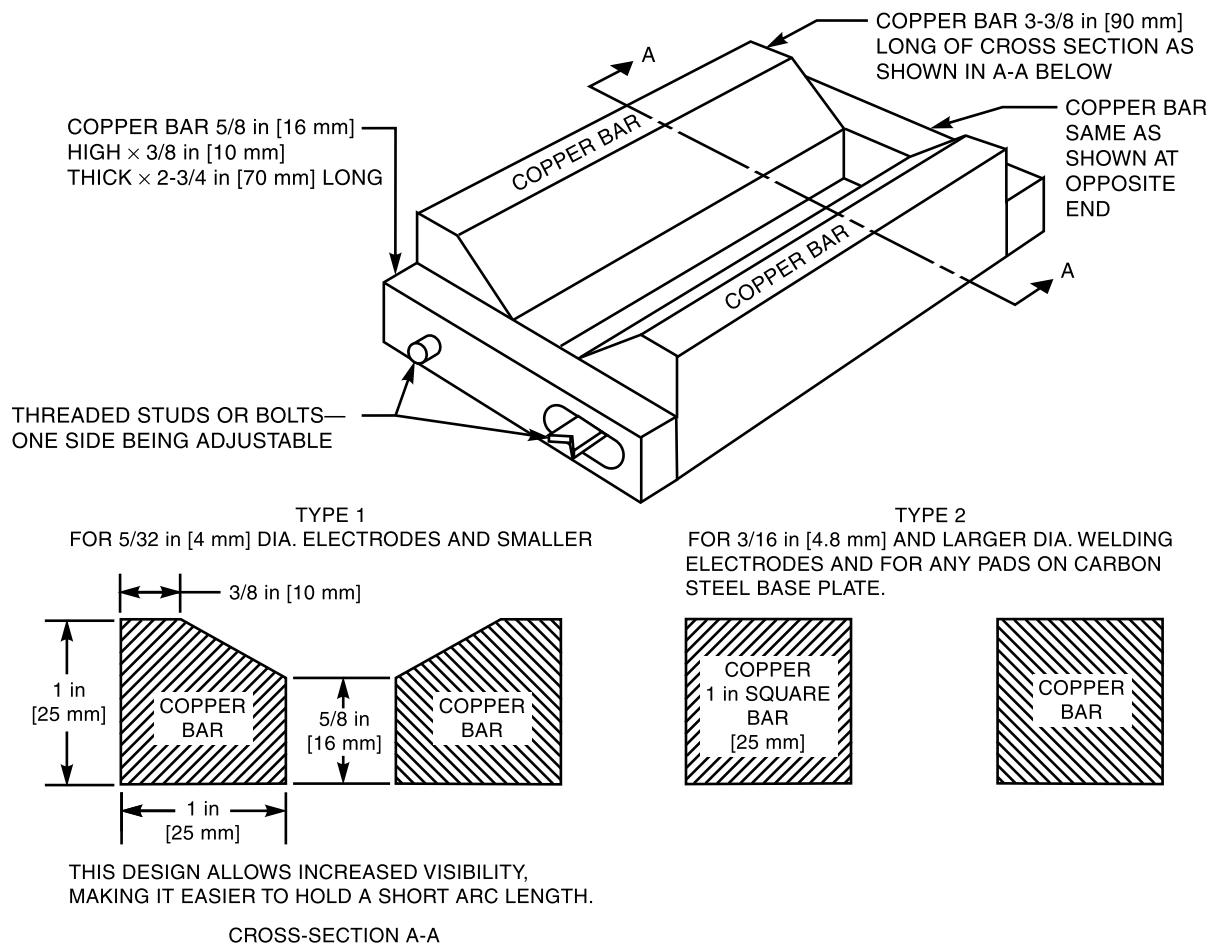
Optional Welding Fixture for Welding Ferrite Test Pads
